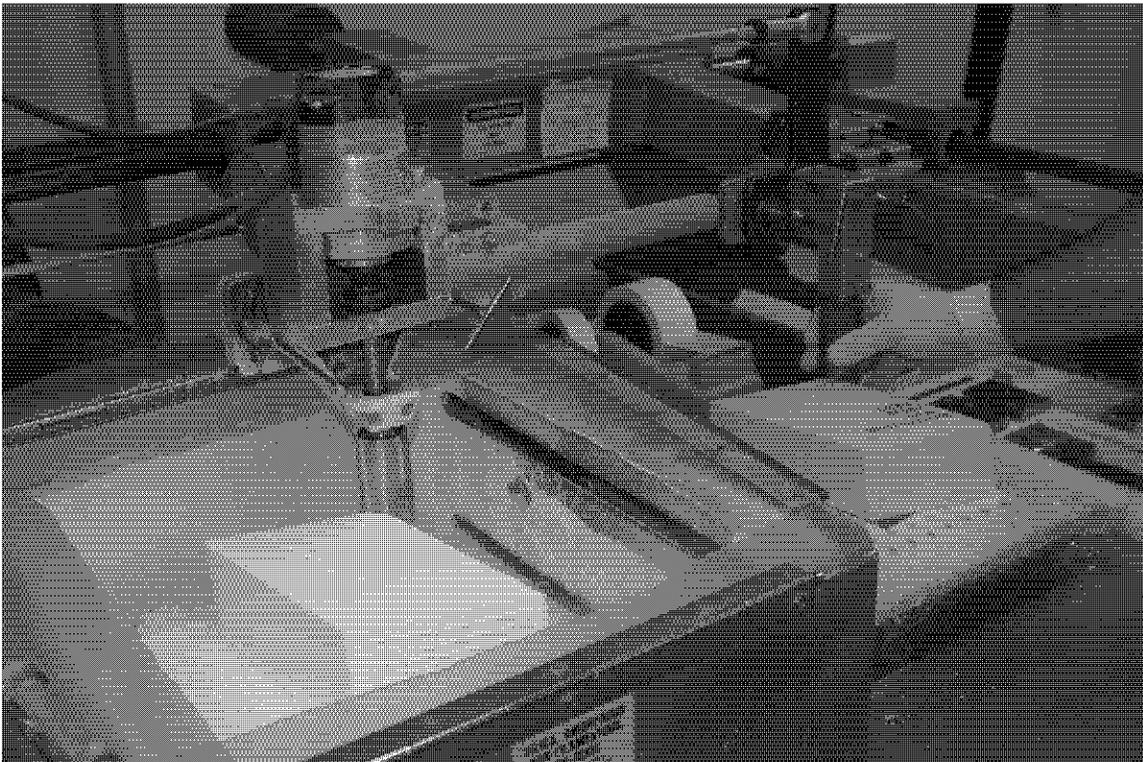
Tile technician, Sean Druck, using Contour Milling Machine, March 10, 2010.
